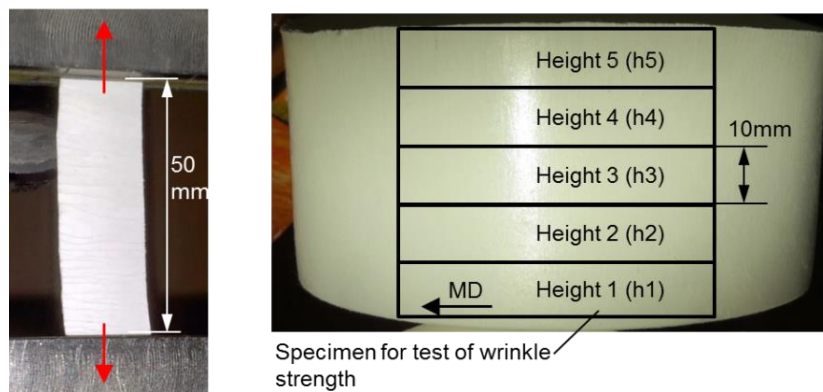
Arrangement of specimens cut from the wall of 3D-structures. The example is a 50-mm wall.
